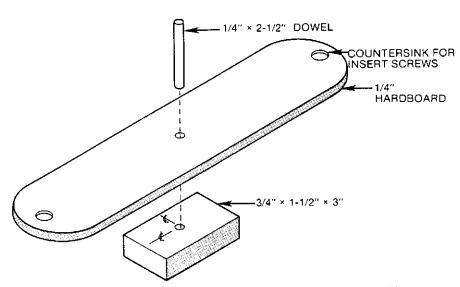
Construction details of a special drilling insert. Use your table saw insert (Model 500 or 510) as a pattern. Drill a hole for the dowel after the special insert is secured in the table.
